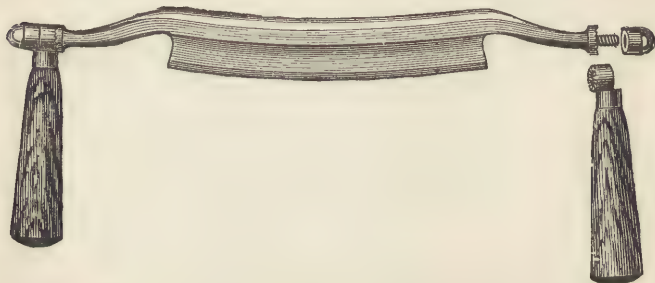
DRAW-KNIFE WITH ADJUSTABLE HANDLES.
